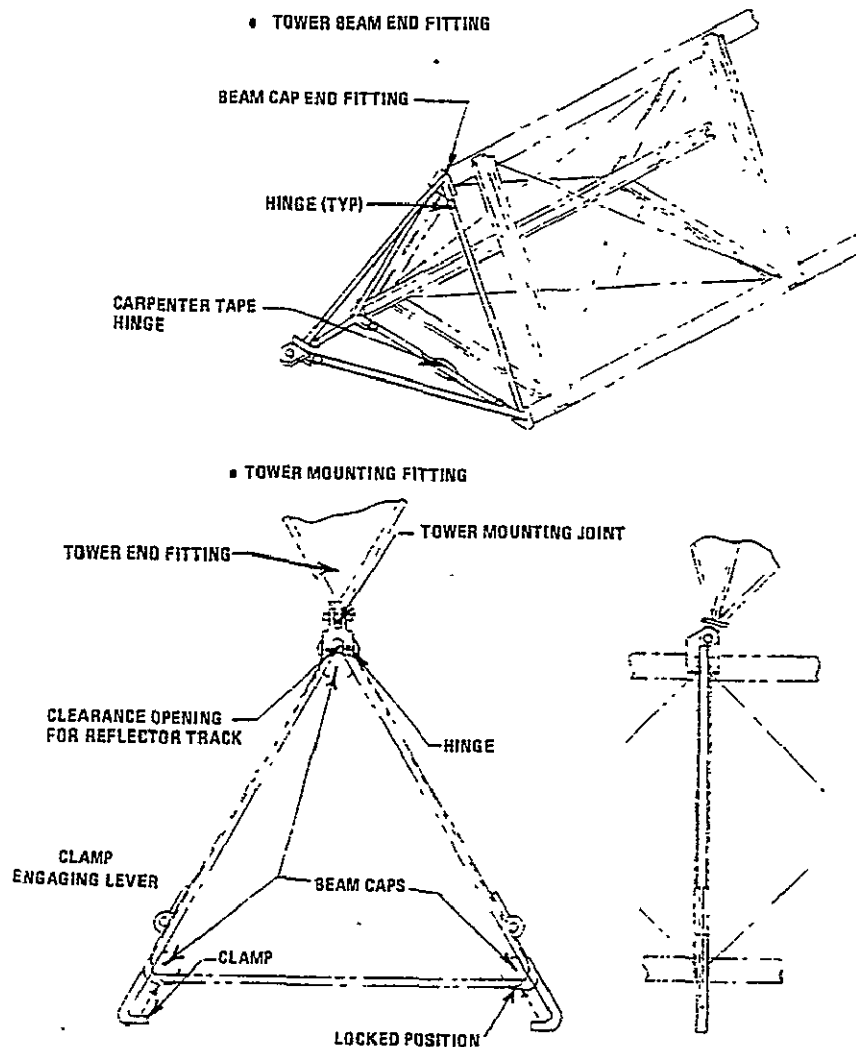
Tower support beam end fitting and mounting fitting concept.
